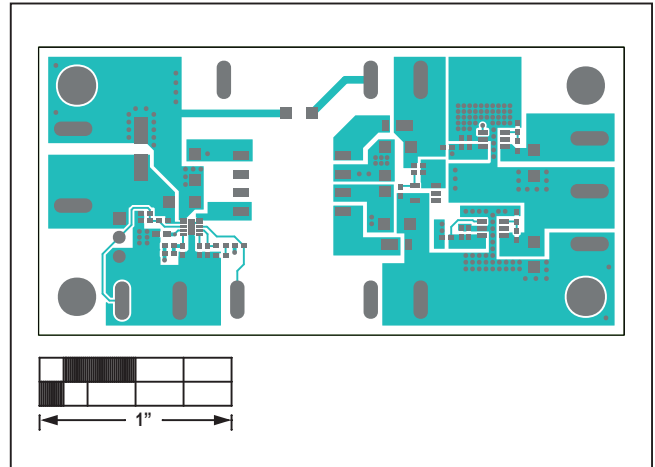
MAX17681A EV Kit PCB Layout—Component Side
